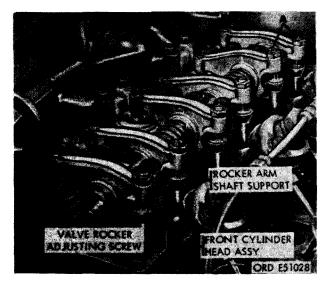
REMOVING OR INSTALLING CAP SCREWS SECURING ROCKER ARM SHAFT SUPPORTS.
